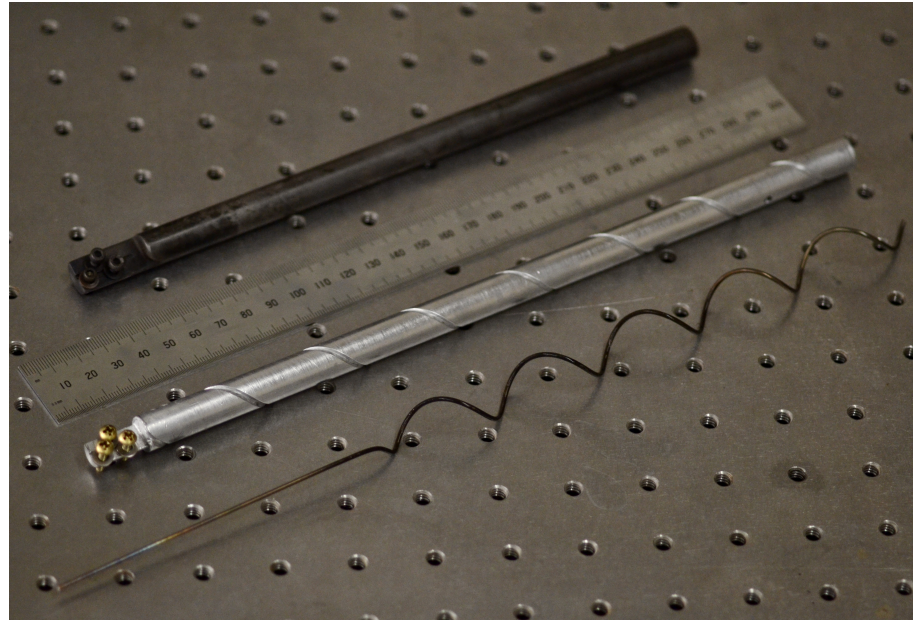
Image of a model flagellum (helix), forming mandrel (bright aluminum), and annealing rod (oxidized stainless steel). The aluminum forming mandrel had helical V-shaped grooves that were used to create model flagella with different wavelengths. After forming, the flagella were annealed on a smooth precision annealing rod to increase uniformity in the radius ($\Delta R < 0.1$ mm). The helical parameters are listed in Table 3.
